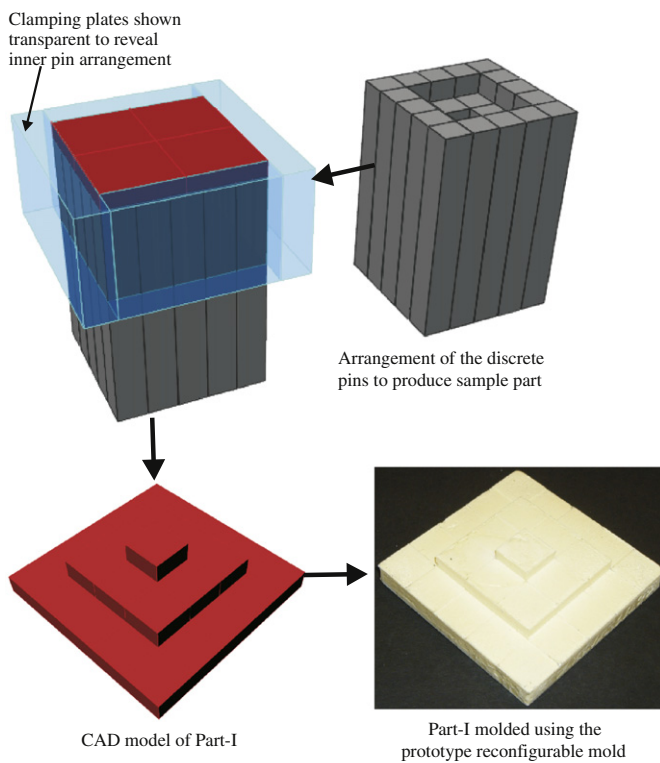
Sample part fabricated using prototype reconfigurable mold tool.
